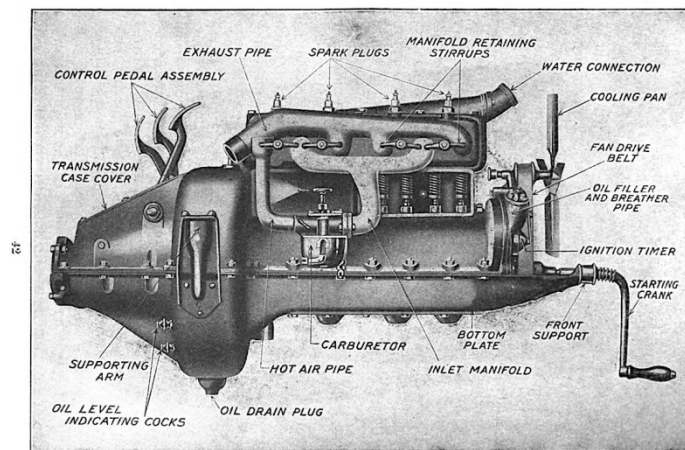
Valve Side of the Ford Model T Unit Power Plant Showing Manifolds, Carburetor and Interior of One of the Valve Spring Chambers.
